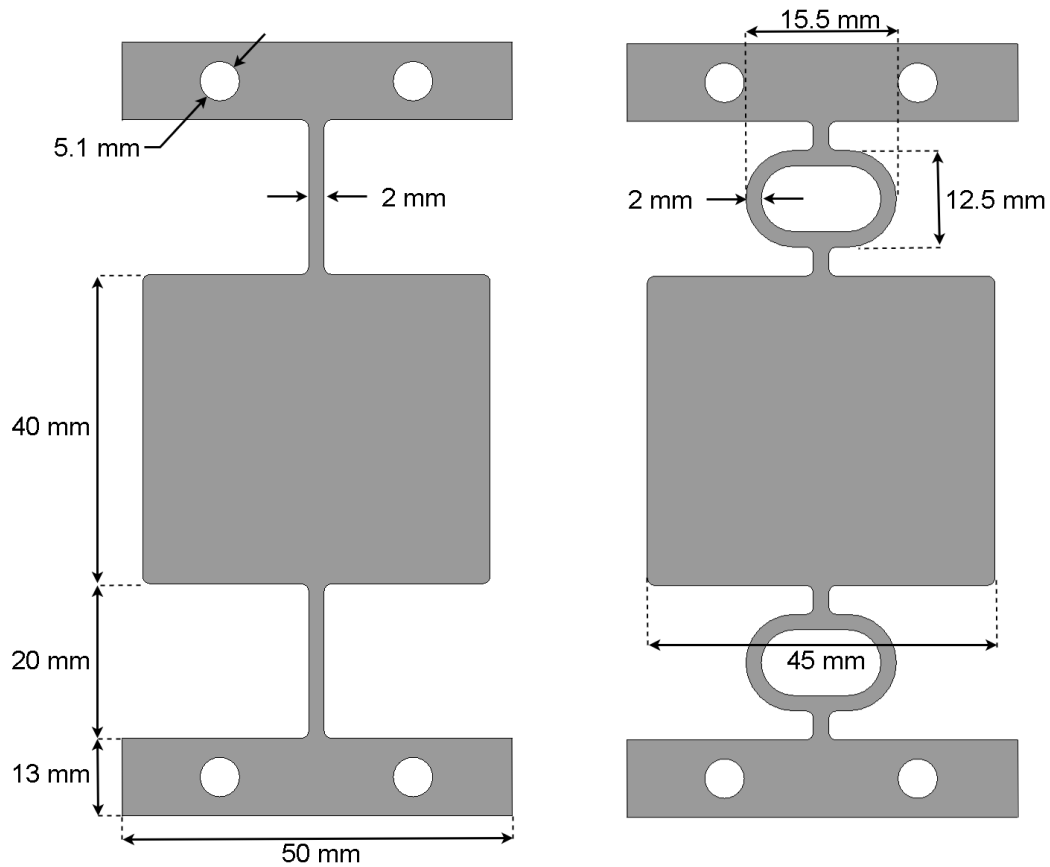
Dimensions of the blank geometry for the ‘I’ and ‘O’ stretch-webs [123].
